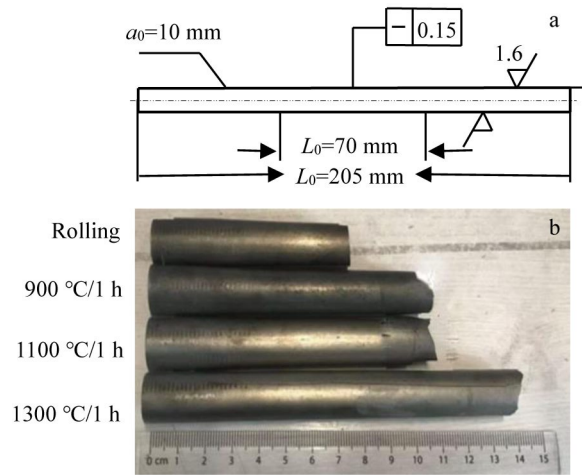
Geometric dimensions of the tensile (a) and fracture (b) samples
